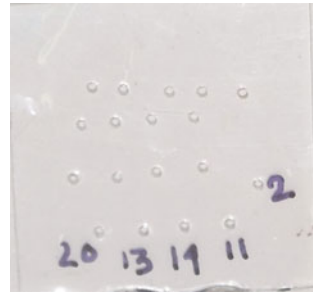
Pictorial view of the machined workpiece at multi-objective parametric setting
